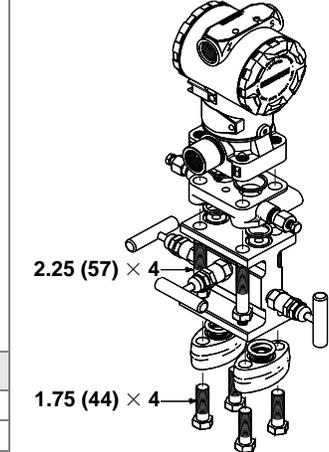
Coplanar Mounting Bolts and Bolting Configurations for Coplanar Flange.
